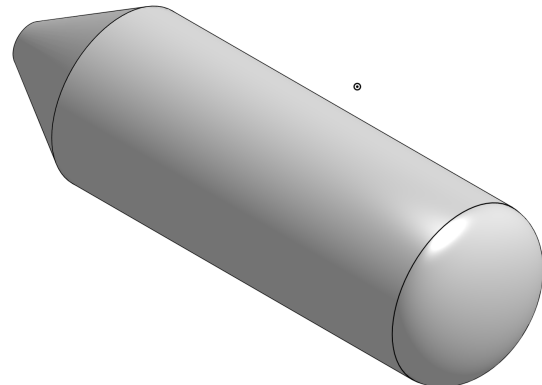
Separate CAD view of the pressure vessel body, including the cylindrical shell, conical head, and 2:1 ellipsoidal head.
